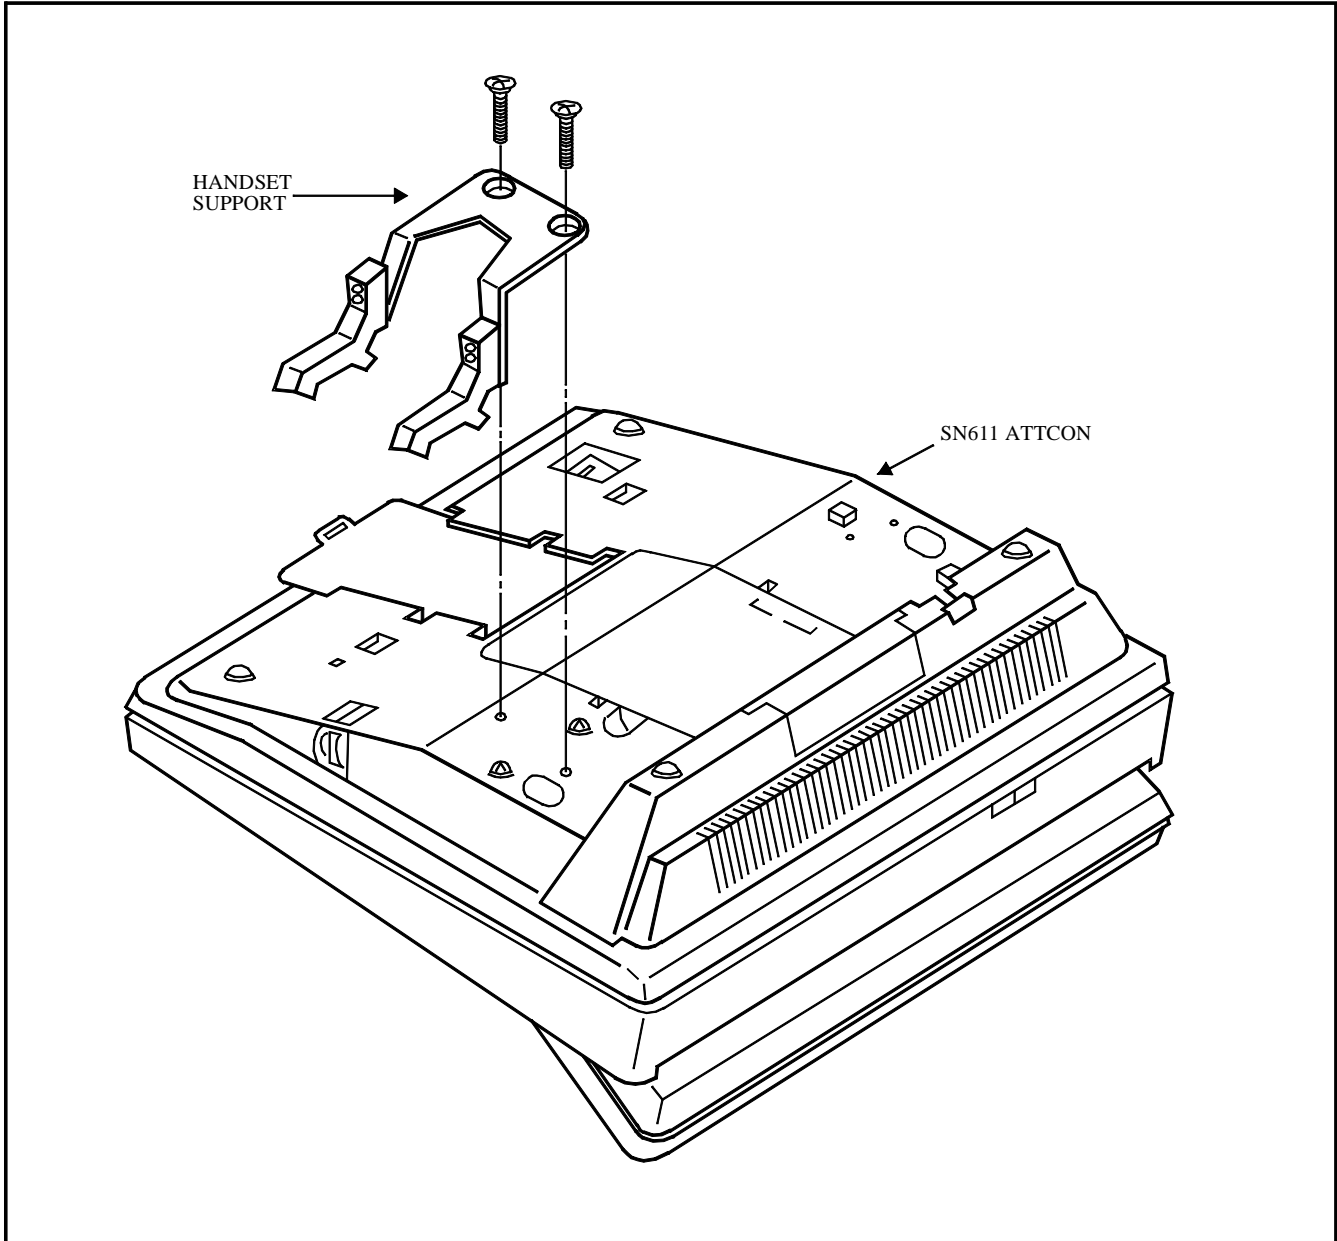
Mounting of Handset Support to SN611 ATTCON
